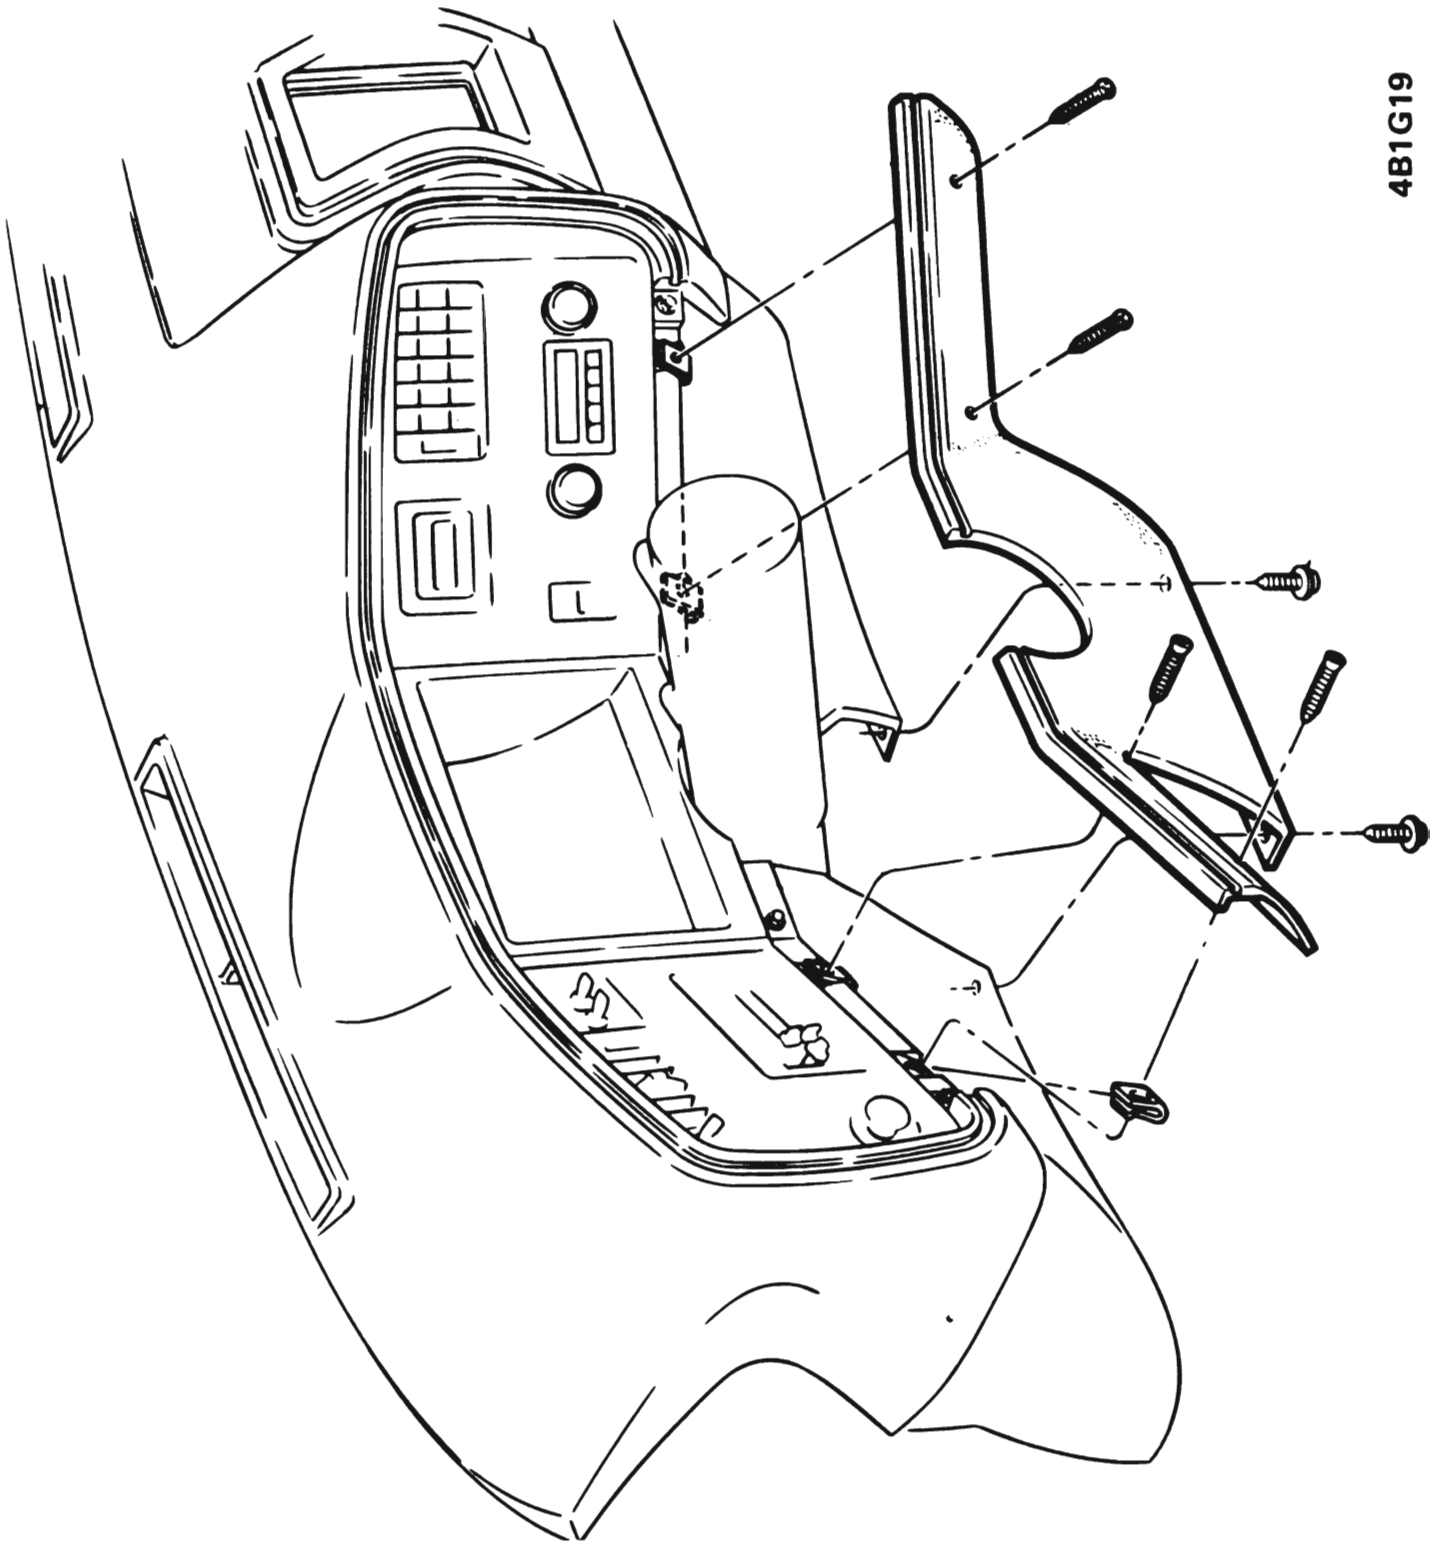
G-19 "B-C-E" Series Lower Instrument Panel Filler
